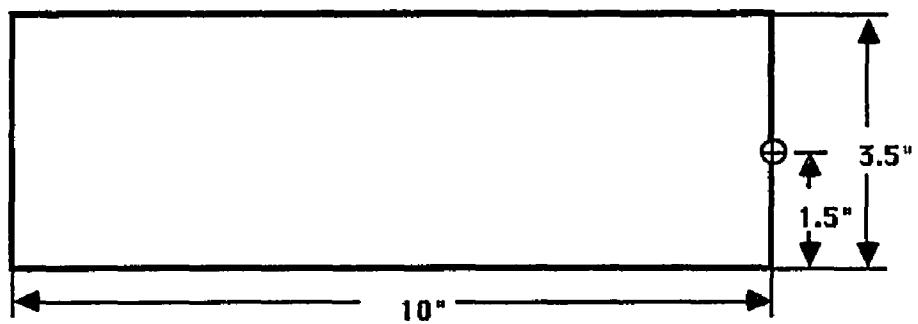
Wire Stripper Footprint in the Wire-Harness
